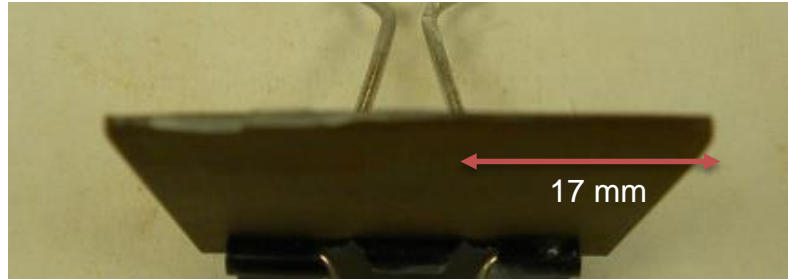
Photo of fracture surface of sample F19 (90%)
